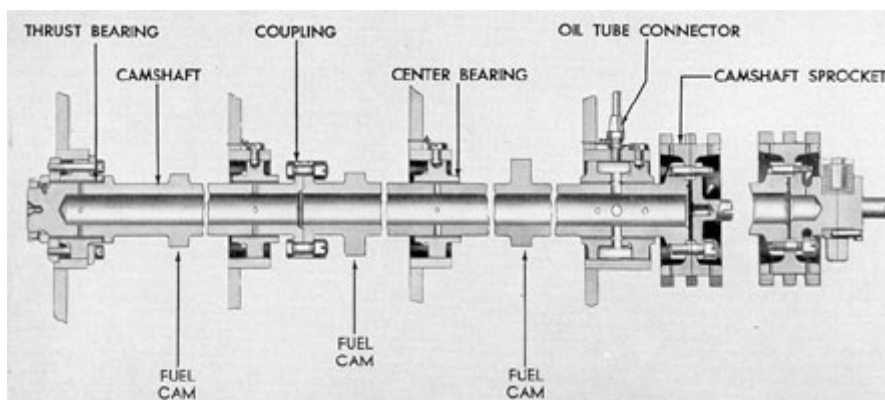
Camshaft cross section showing control end of both camshafts, F-M.
